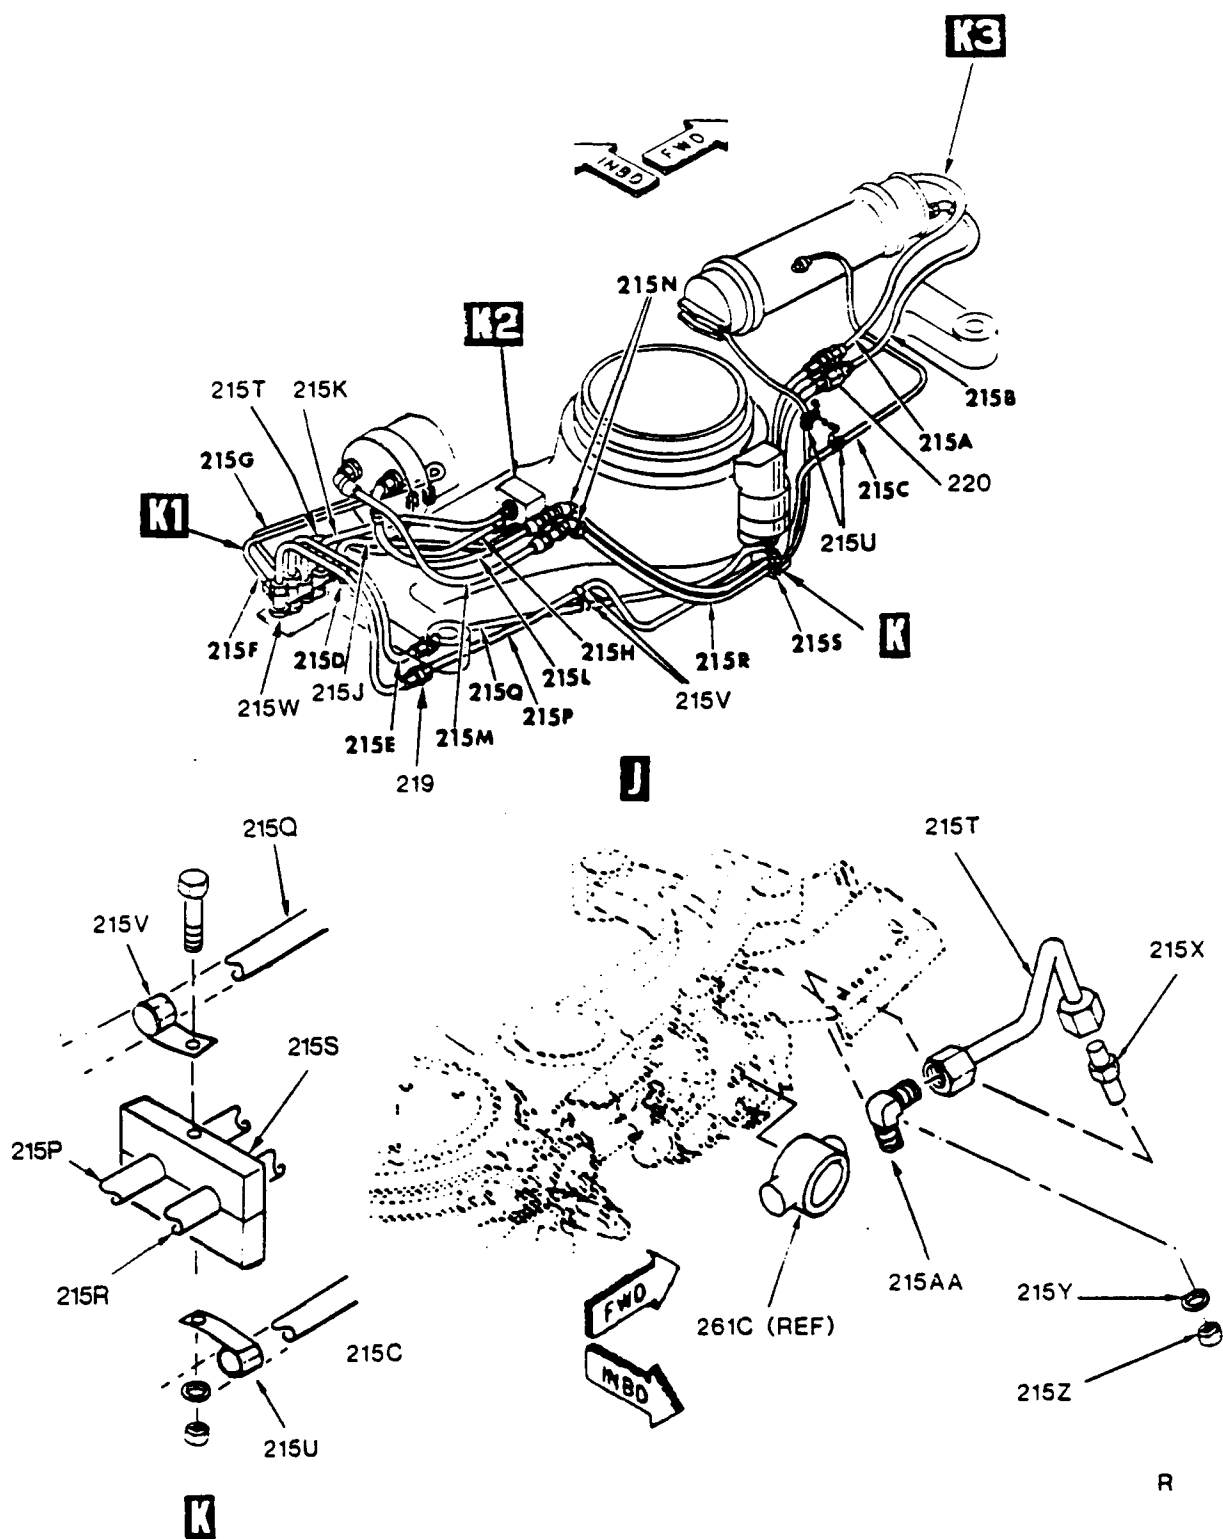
RH Aft Strut Assembly (Sheet 7 of 18)
